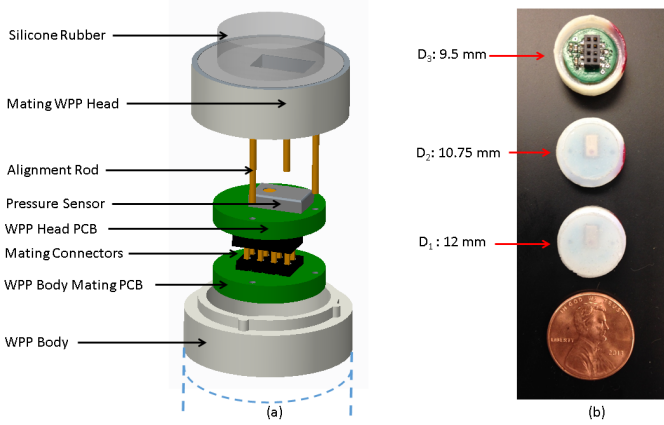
The WPP head explosion view (a), the fabricated heads of different diameters (b).
